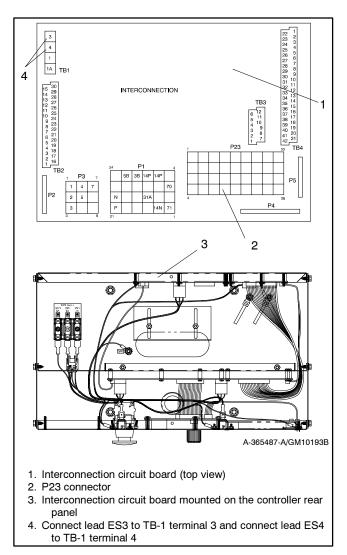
Attaching Wiring Connection Harness to Controller Circuit Board
